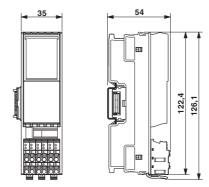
Nominal dimensions of the H housing with one terminal field and short connectors (type 1H (S), e.g., AXL F SSI1 AO1 1H)
